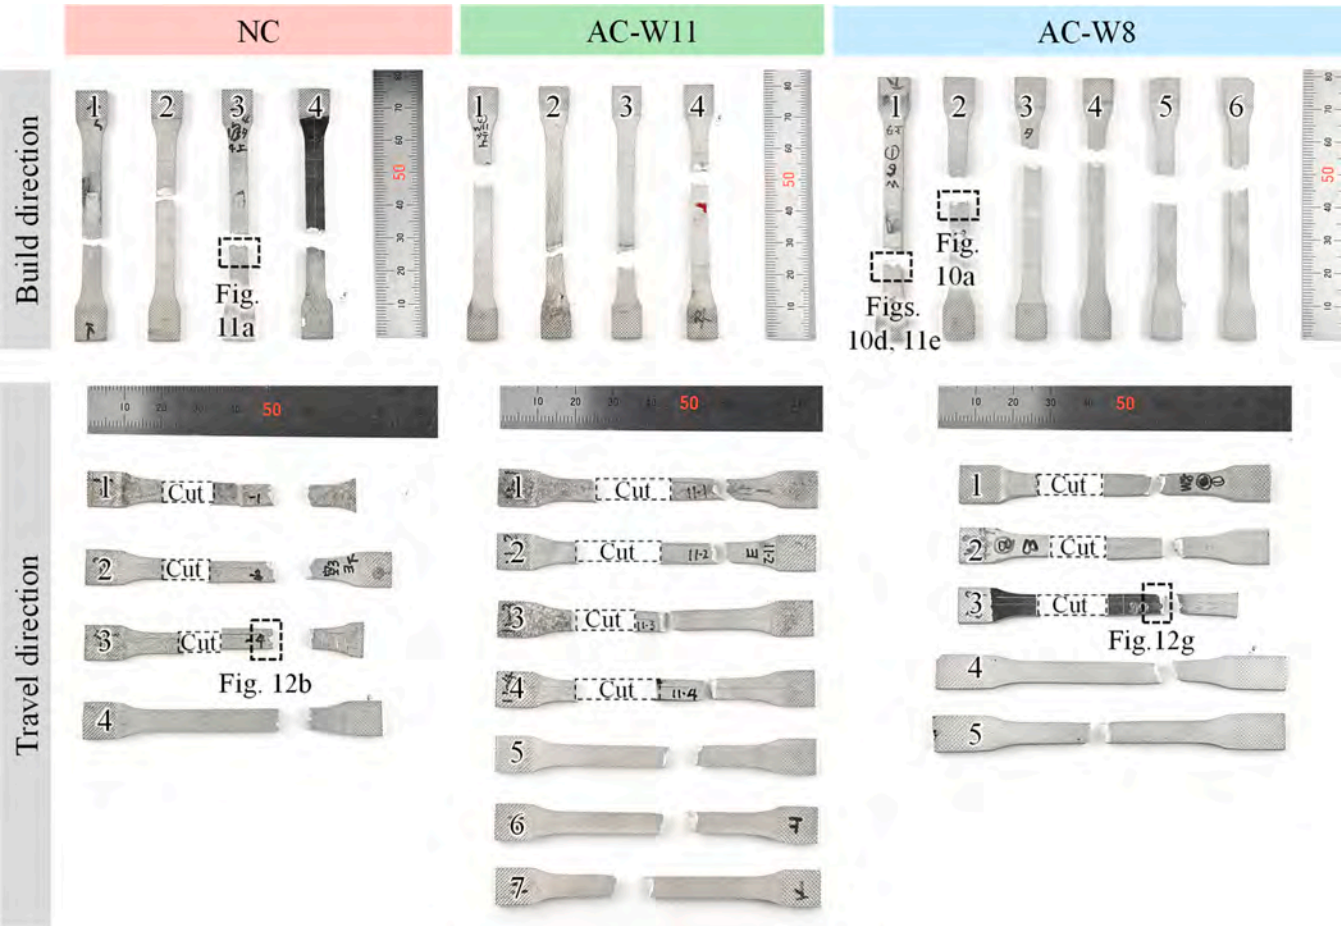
Macro-scale appearances of all fractured tensile specimens.
